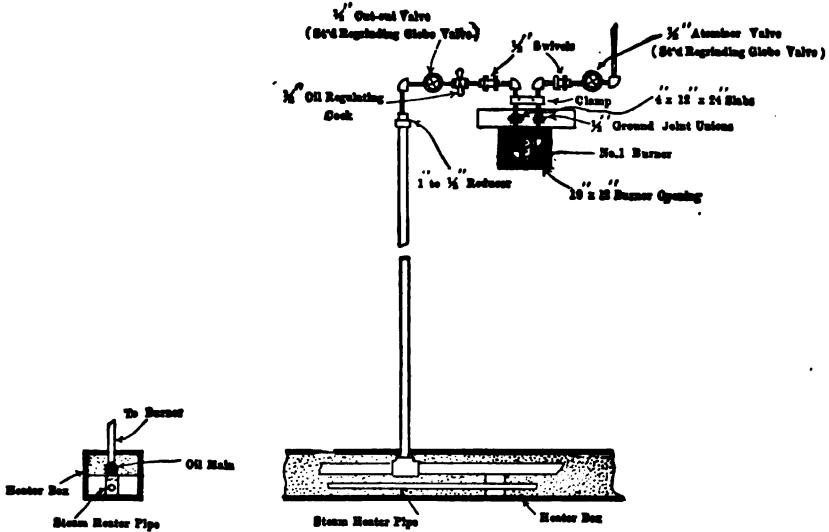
Swivel-joint burner piping. Also heater box required for burning heavy oil.
